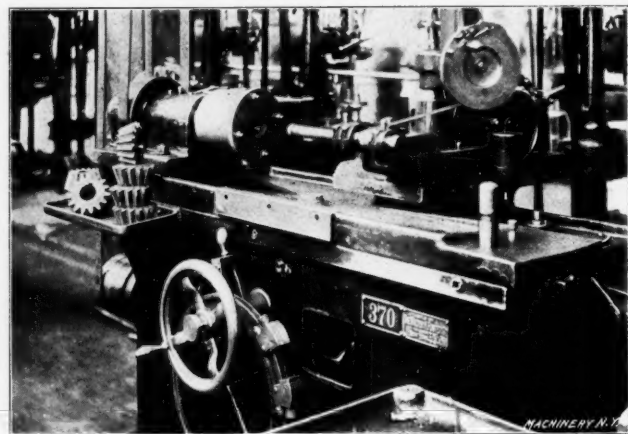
Grinding the Hole in a Hardened Bevel Gear—See Detail of the Chuck in Fig. 28
